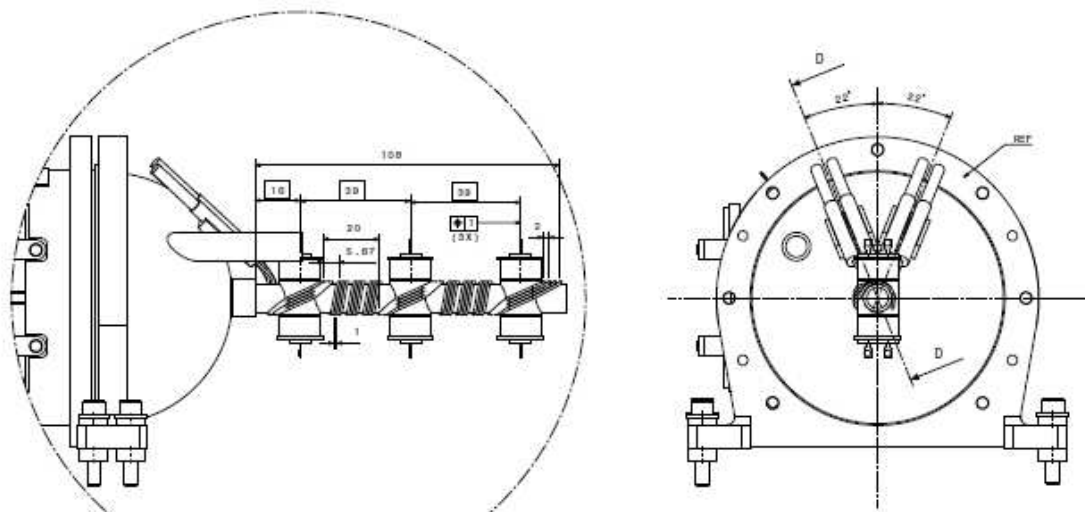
Accumulator detailed drawing of wire heaters placement on heat pipe
